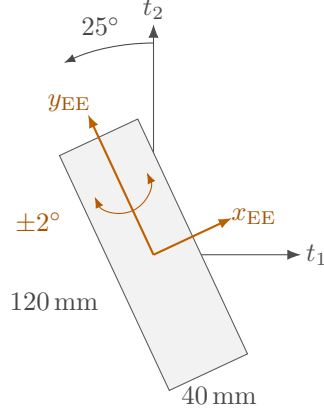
Calibrated grinding face and mounting axes in the surface plane.
